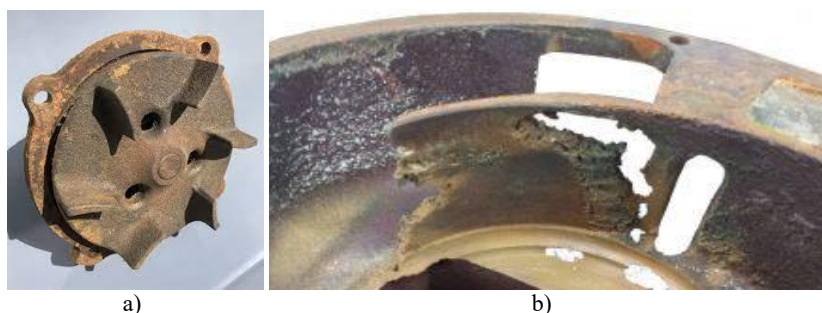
Severe degradation of a submersible pump impeller and housing due to the combined action of mechanical abrasion and acid corrosion of the transported liquid medium: a) rotor; b) the casing.
